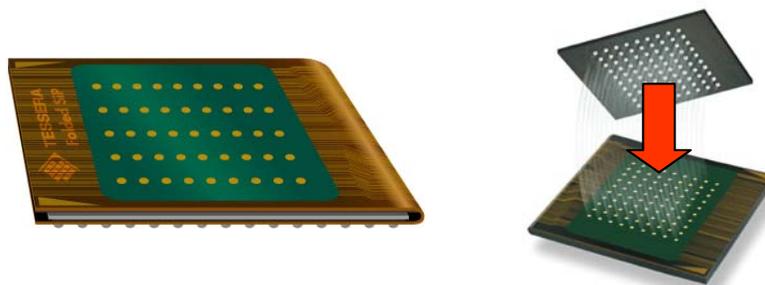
The Fold-Over Package Technology Provides a Land Pattern on its Top Surface to Accommodate the Stacking of Additional Packaged IC Devices
